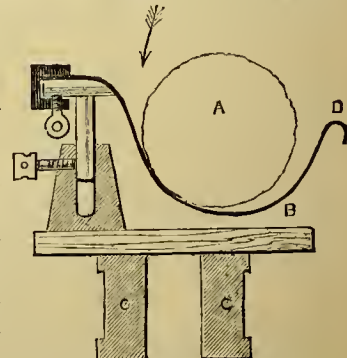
HOOP IRON CLAMPED TO T-REST. A, Glass Disc; B, Hoop Iron; C, Lathe Bed.
